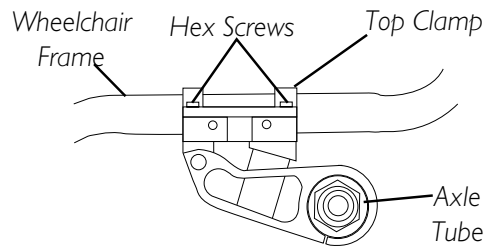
ADJUSTING WHEELBASE LENGTH (ADJUSTING CENTER OF GRAVITY)
